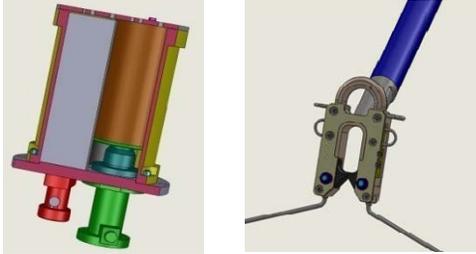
Rope throwing device Fig.5 Lifting lock and carbon fiber rod
